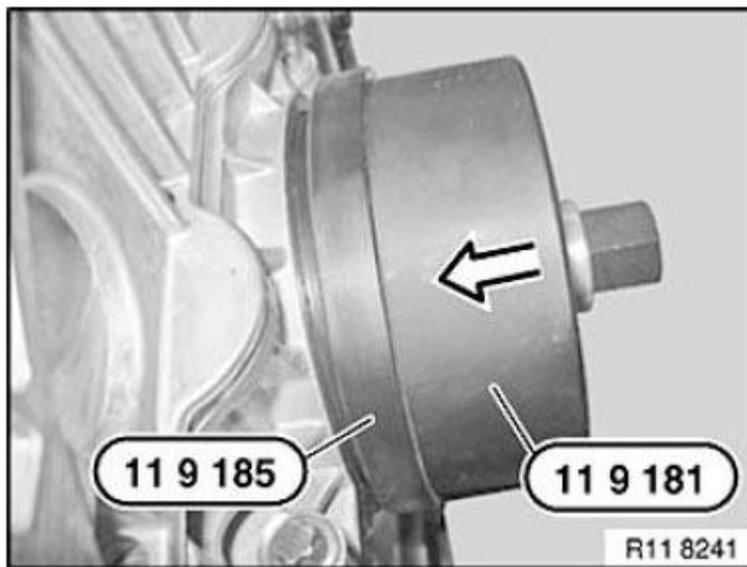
Installing Rear Crankshaft Seal Using Tool 119 180/181
